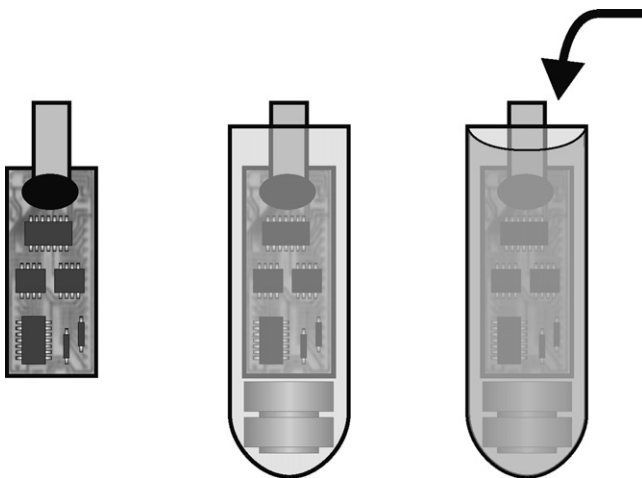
Packaging scheme. The sensor chip is mounted on the PCB and the wire-bonds are glob-topped. The PCB and batteries are connected and put in a polystyrene tube. The tube is filled with glue (potted) covering the system while leaving one end of the sensor chip exposed.
